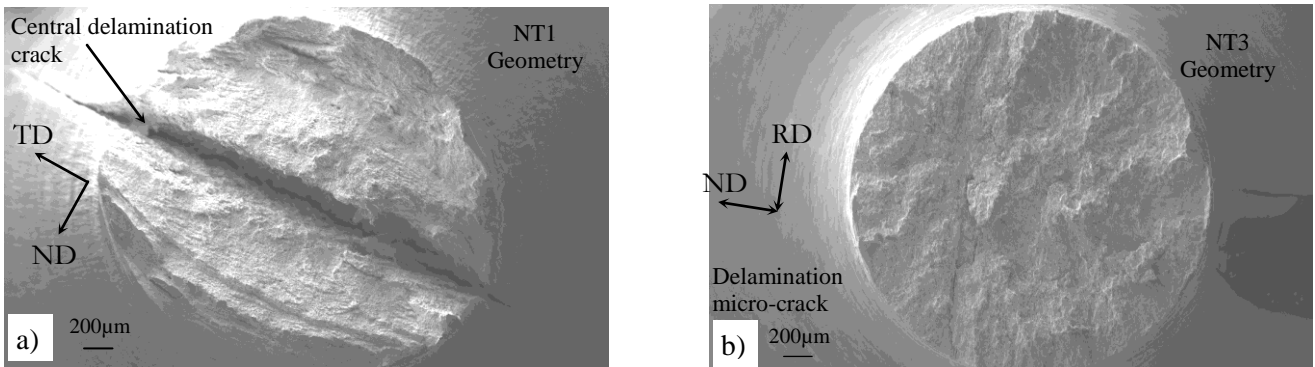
Fracture surfaces (a) of a NT1 specimen (RD, -100°C) and (b) of a NT3 specimen (TD, -196°C)
